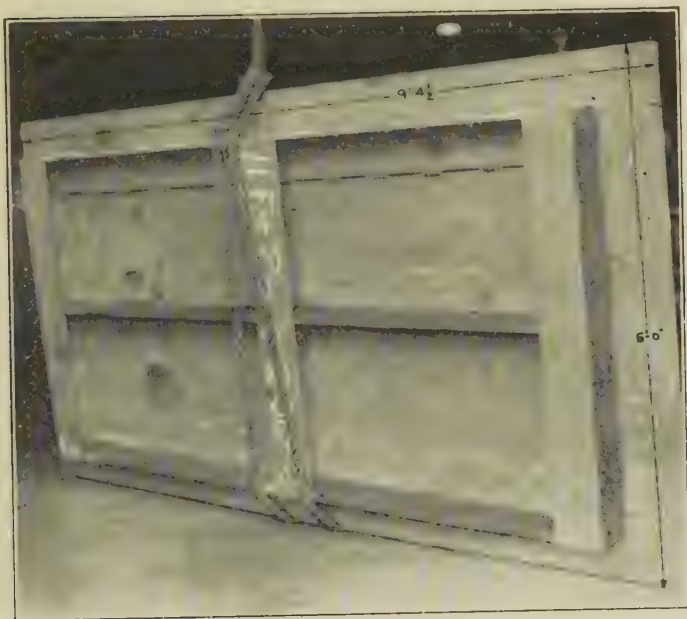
Arc-welded face plate, replacing a casting.
